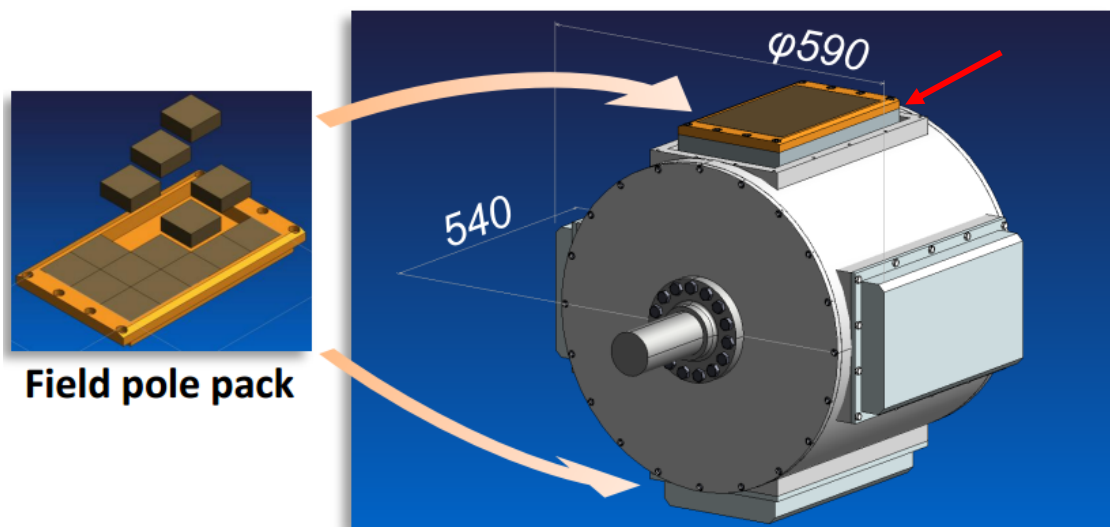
Concept design of bulk HTS pole and outer dimensions of the rotor.
